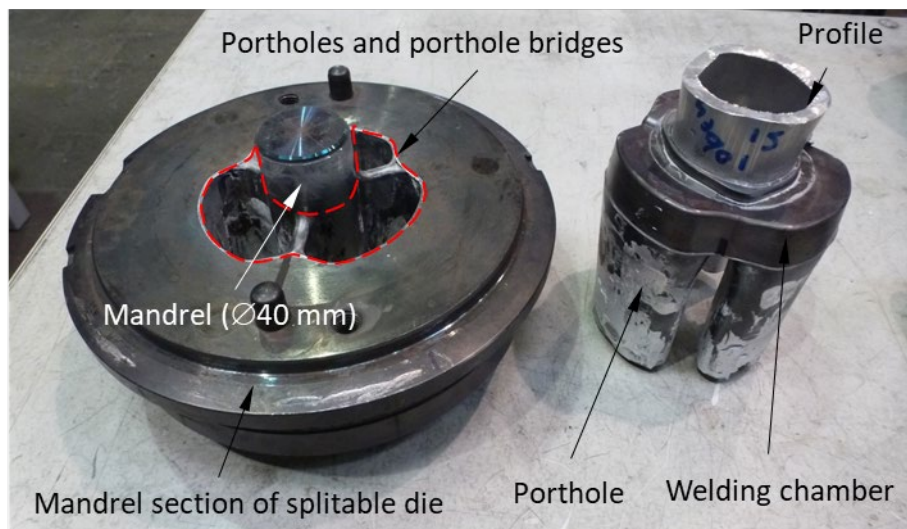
Mandrel section of the splittable die (left) and extracted material (right) after disassembly
